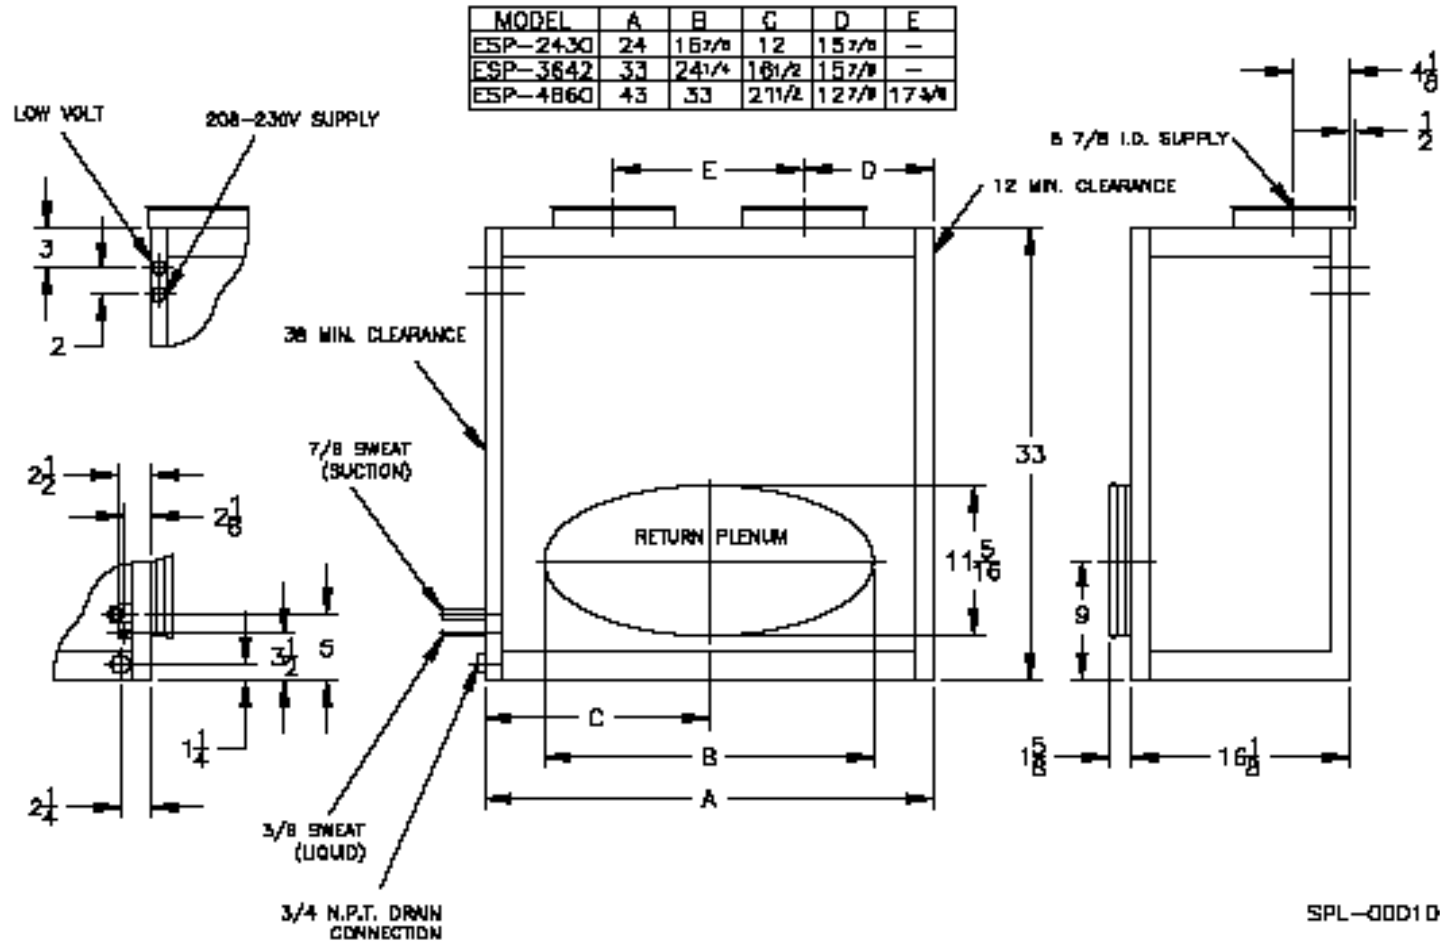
VERTICAL UNIT DIMENSIONS AND CLEARANCES
